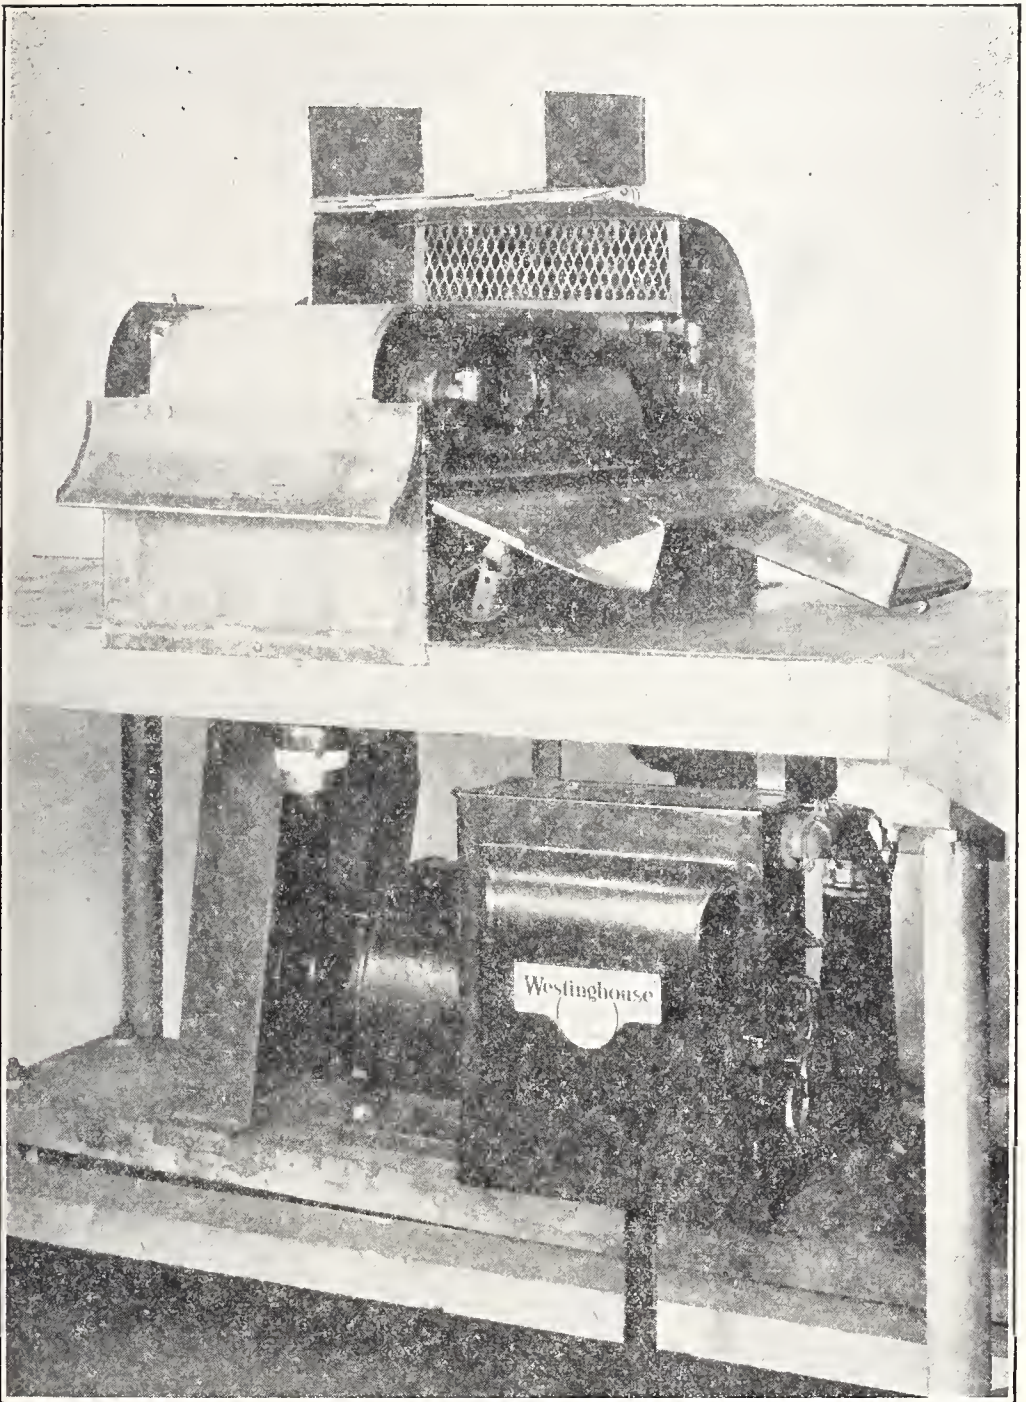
FRONT VIEW OF SANDER SHOWING FACILITY WITH WHICH HINGED SECTIONS OF GUARD MAY BE THROWN OPEN
